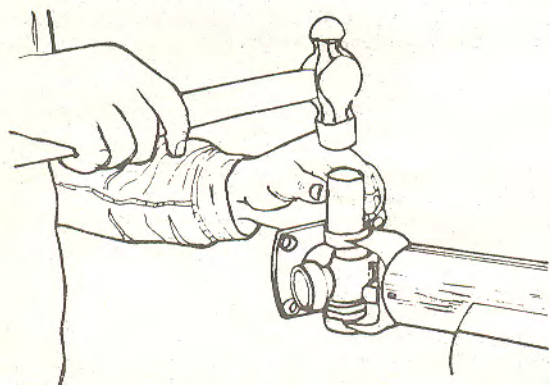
Dismantling a universal joint by driving one of the bearing cups into the yoke and removing the other cup.
